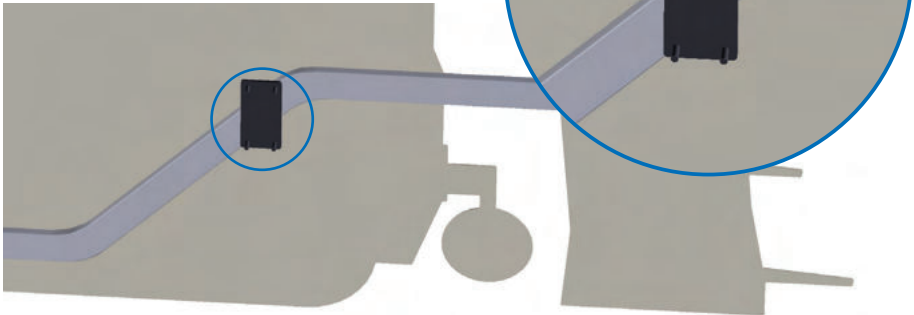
Example of location of the mounting plate for the Front Beam Mounting
